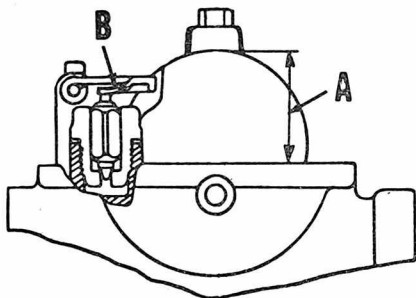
Float level (A) should be measured from gasket surface with gasket removed. Adjust level by bending tang (B).
